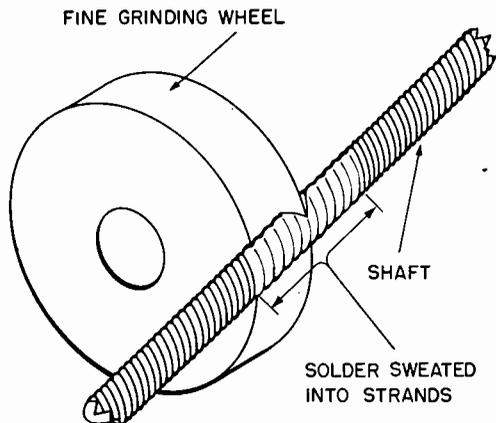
Cutting flexible shafts, using grinding wheel. After soldering to hold strands, grind notches in alternate sides of shaft until it breaks. Do not allow grinder to heat shaft until solder melts. Outer housings may be cut in the same way.
